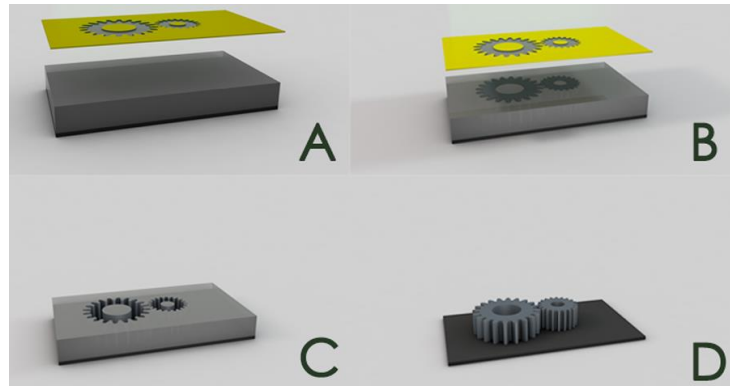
Schematic process of LIGA technique. A) The X-ray sensitive mask is placed on the top of the PMMA. B) The pattern is then transferred onto the surface. C) The PMMA mold is produced and D) The mold fills with metal and the PMMA mold is chemically removed leaving only the metallic geometry on the substrate surface.
